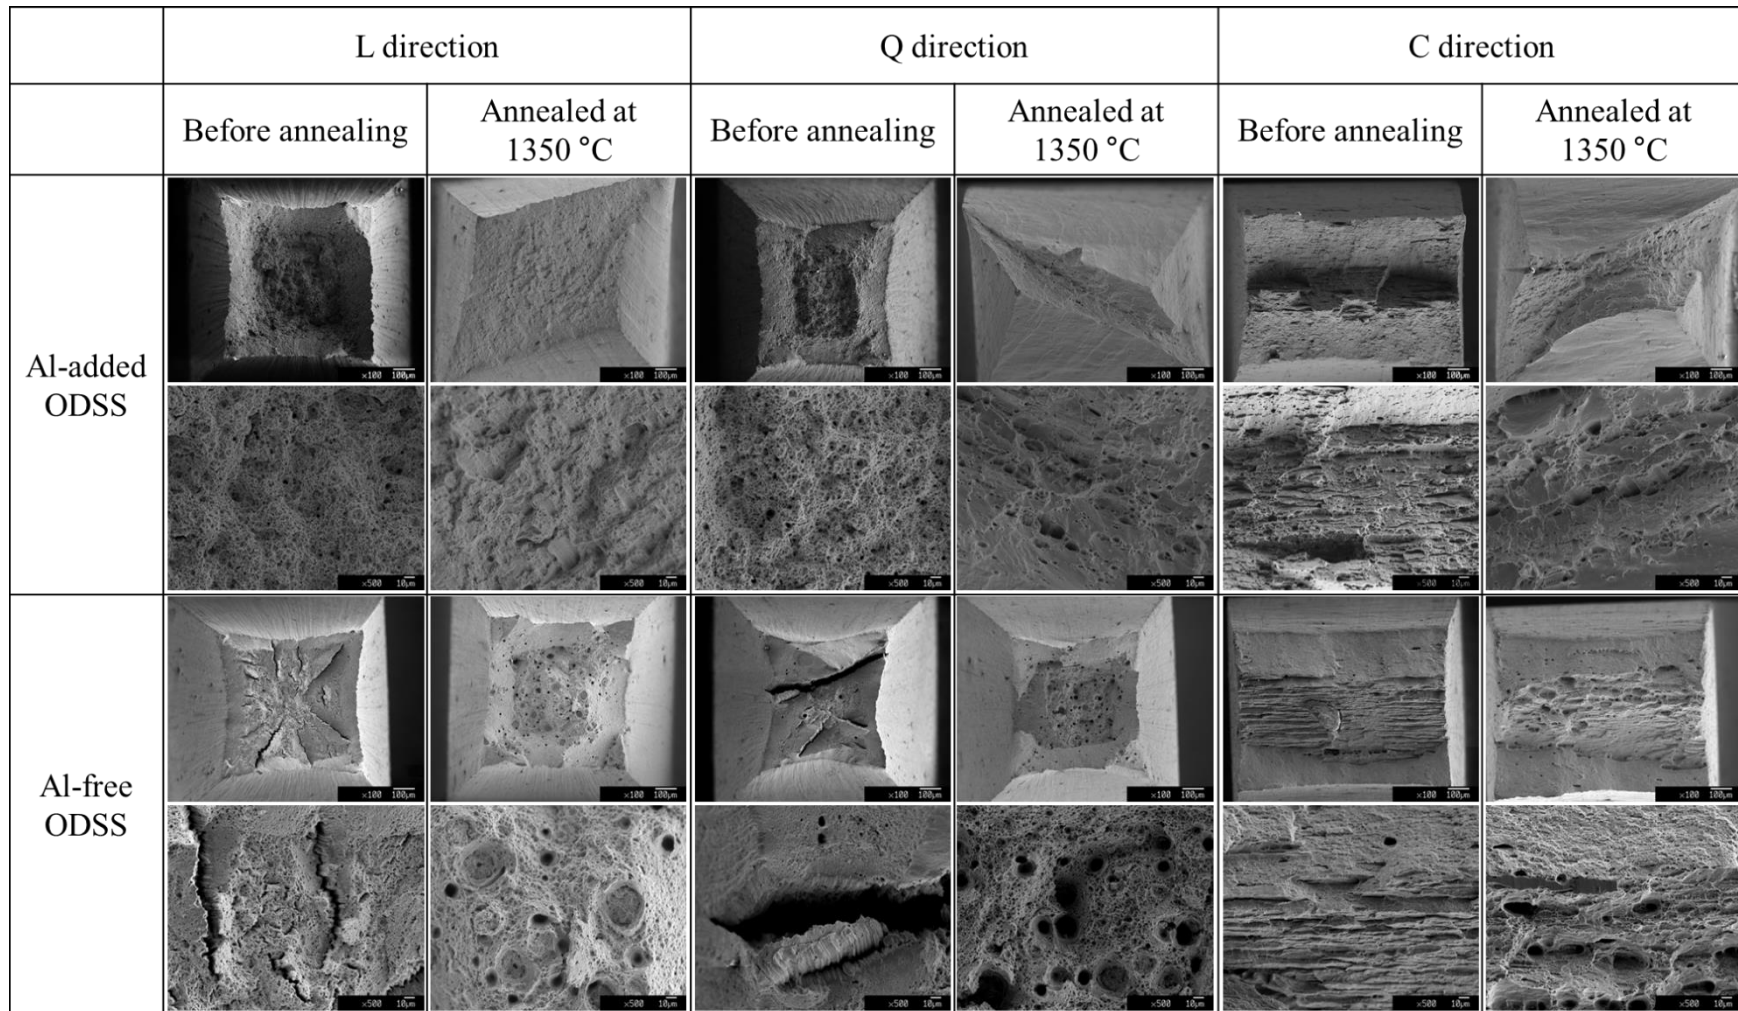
Fracture surfaces of both Al-added and Al-free ODS steel after tensile tests at room temperature
